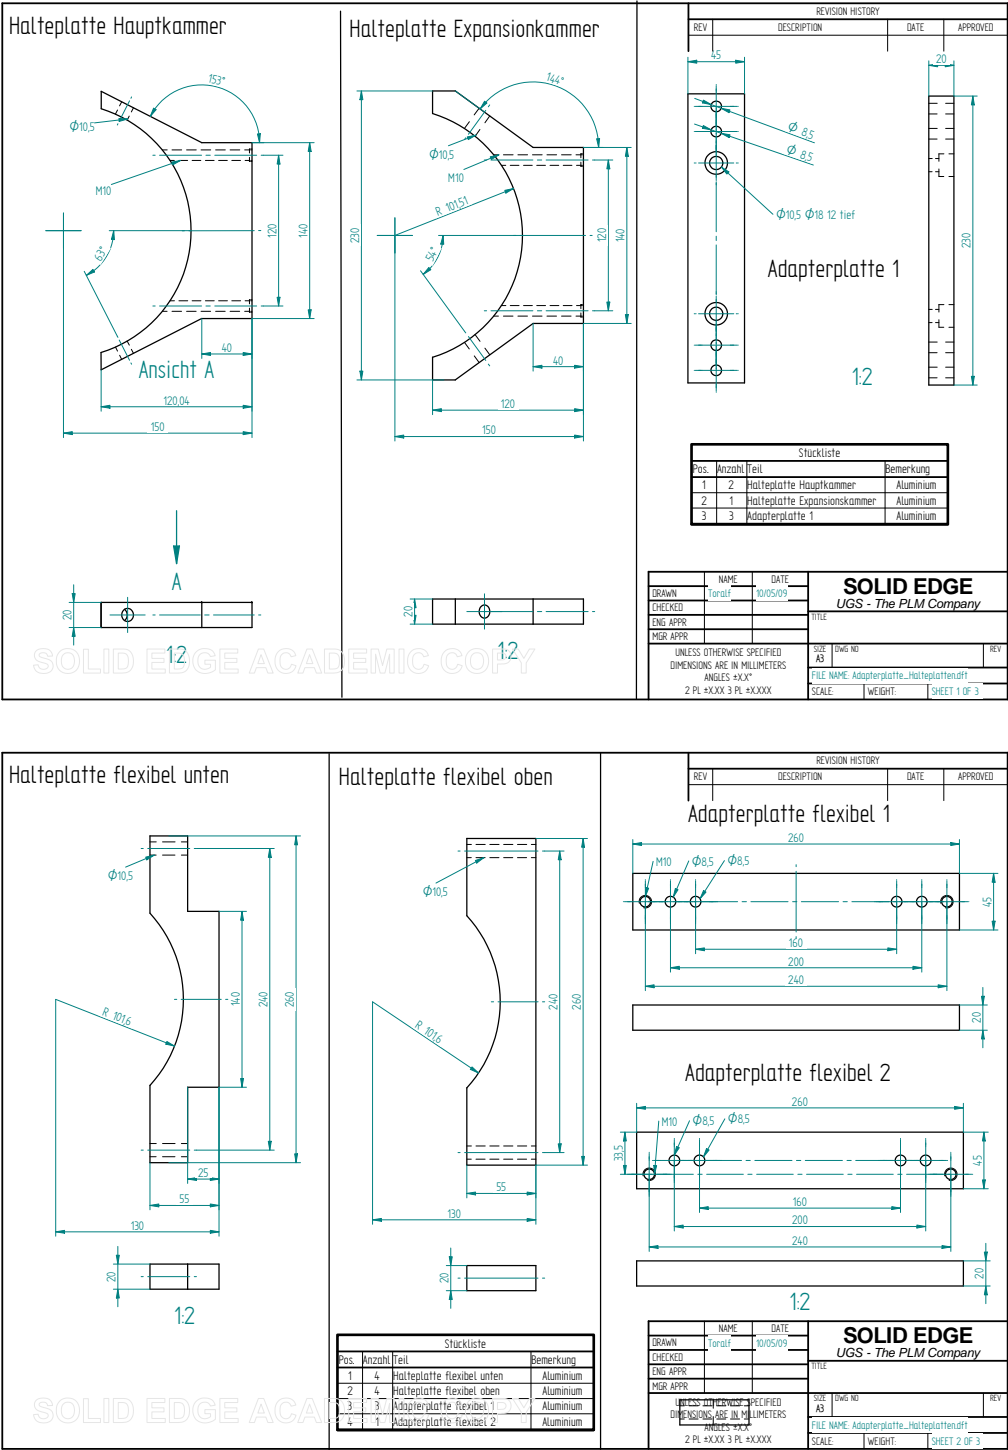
Mounting plates to fix chamber onto minitec frame.
